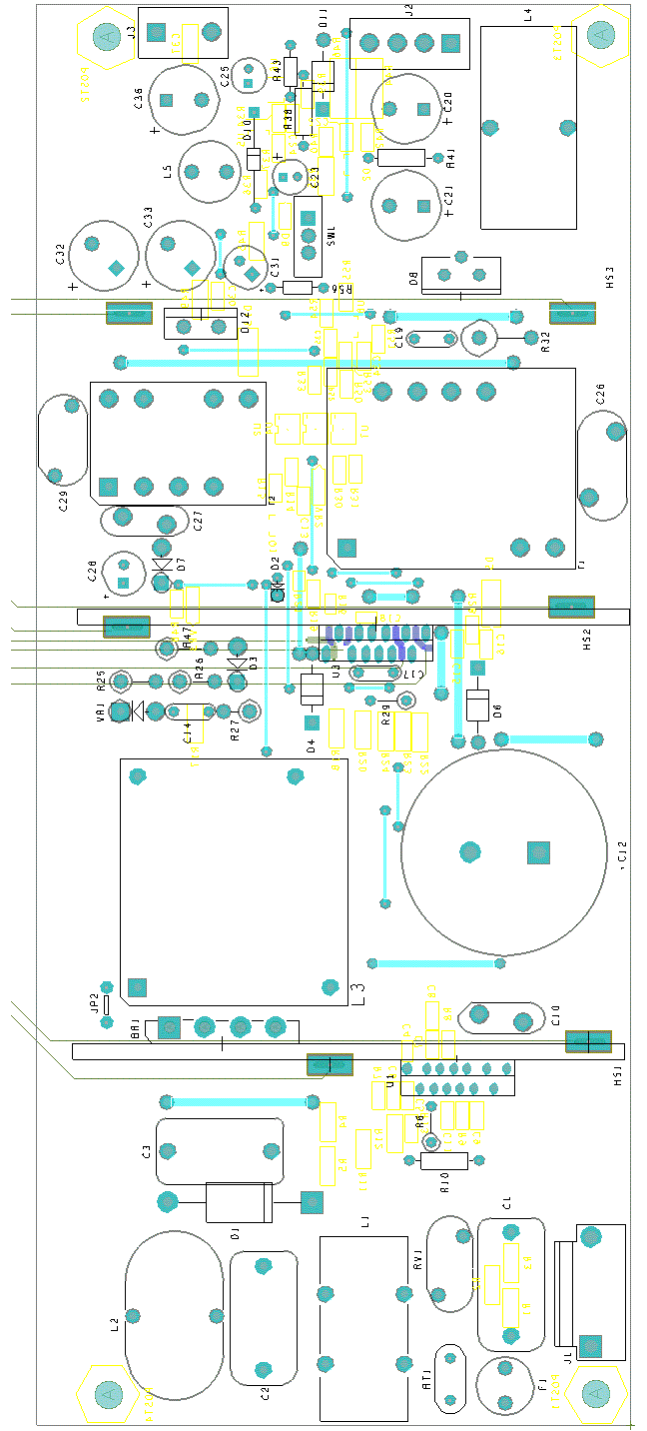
Printed Circuit Layout, Showing Top Side Components with Bottom Side Traces.
